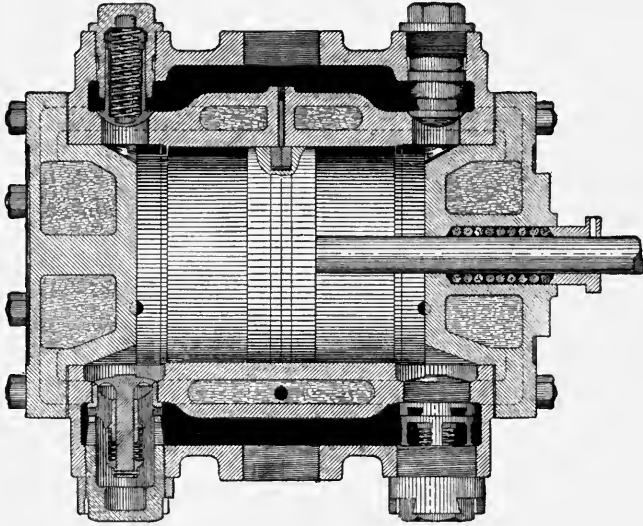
Ingersoll-Sergeant Cylinder and Valves.
